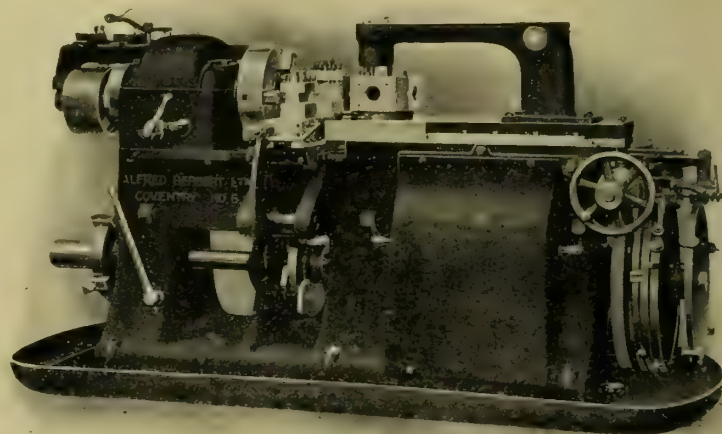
AUTOMATIC TURNING MACHINE WITH PATENT SELF-SELECTING FEEDS AND BACK-FACING ATTACHMENT. MESSRS. ALFRED HERBERT, LTD., COVENTRY.
